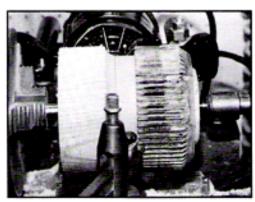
Gear blank, maple adapter ring and original gear were assembled in the lathe during the tooth cutting process.
